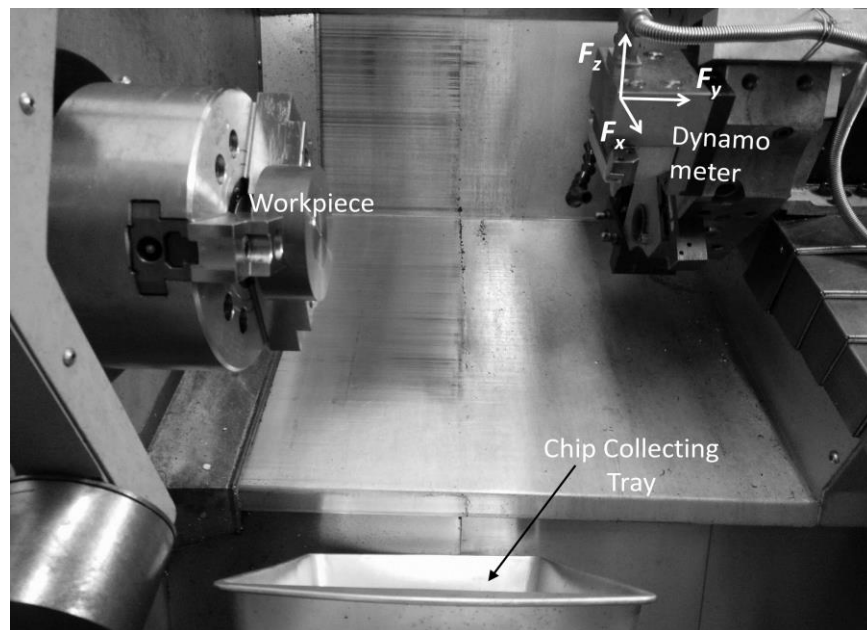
Machining Force Component Overlaid on Kistler Dynamometer and Chip Collecting Tray in CNC Lathe
